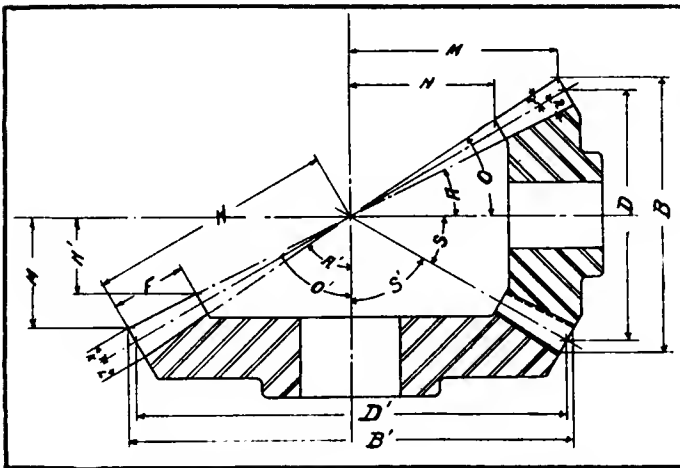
Diagrammatic Layout of Bevel Gear Set.
